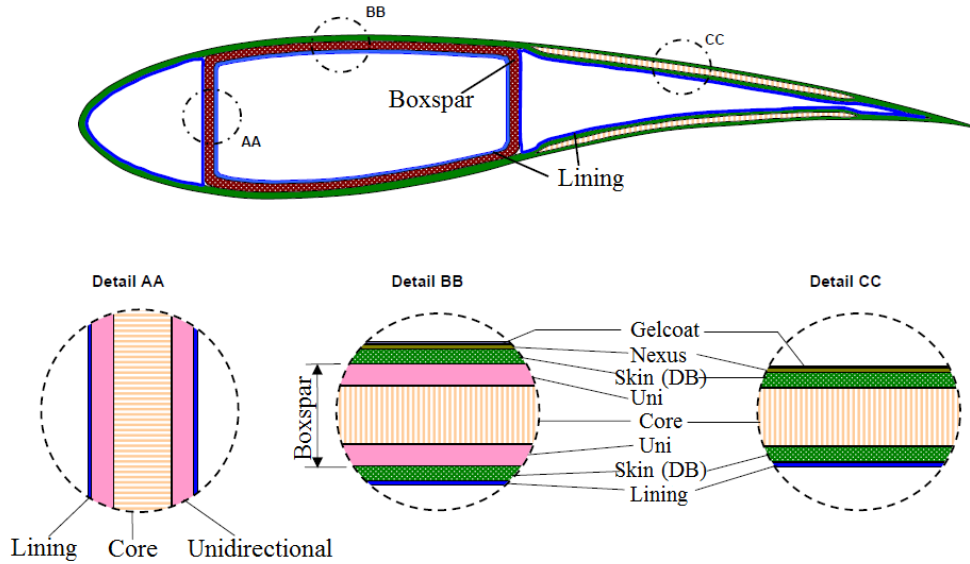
Structural configuration of blade cross-section (Bir and Migliore, 2004)
